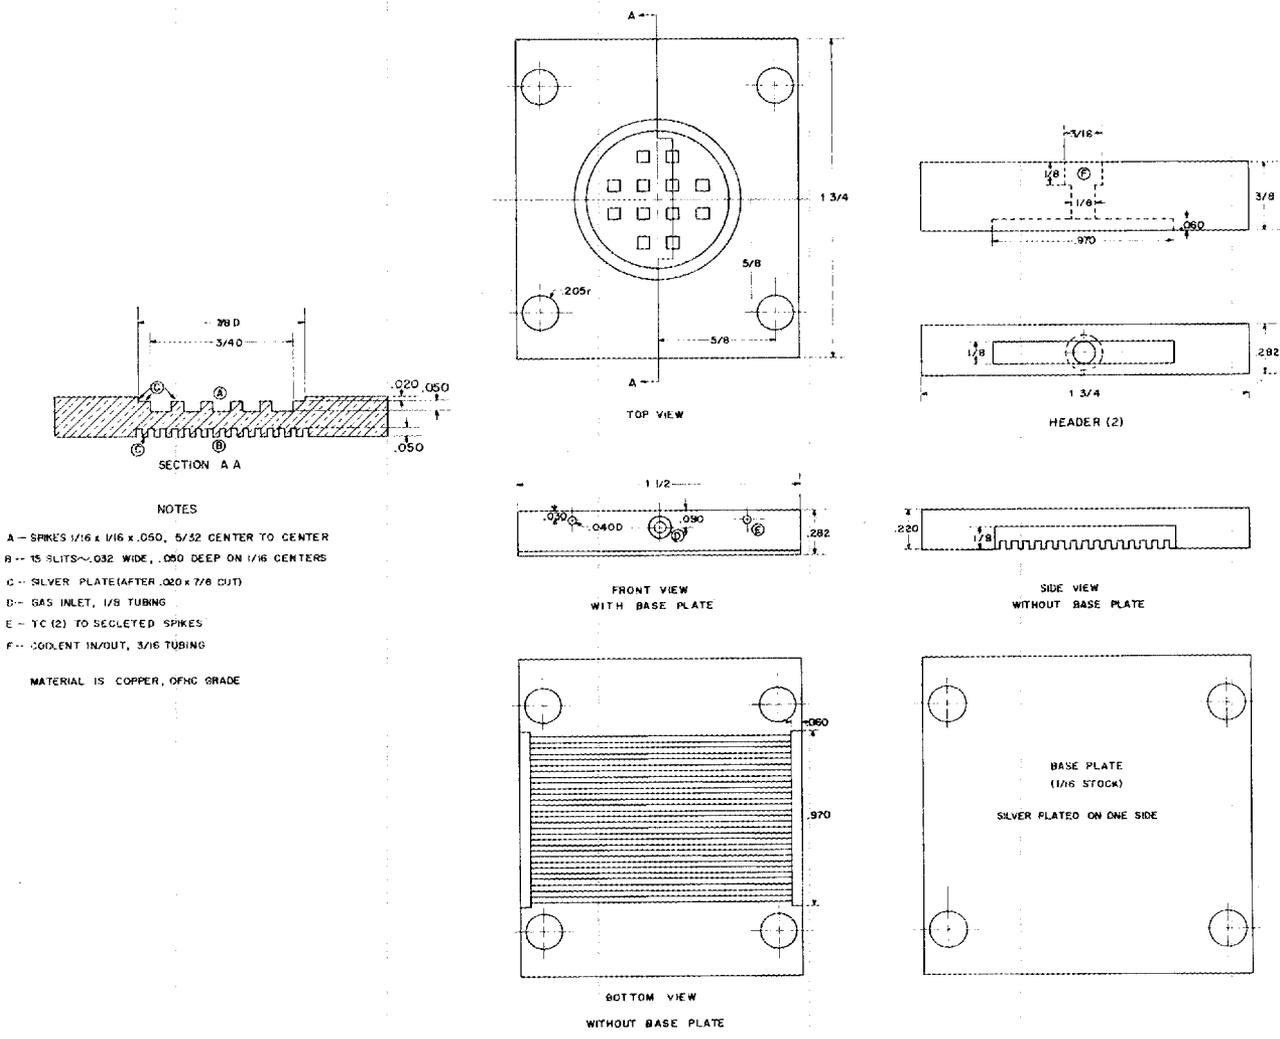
Engineering Drawing of Self-Replenishing Target.
